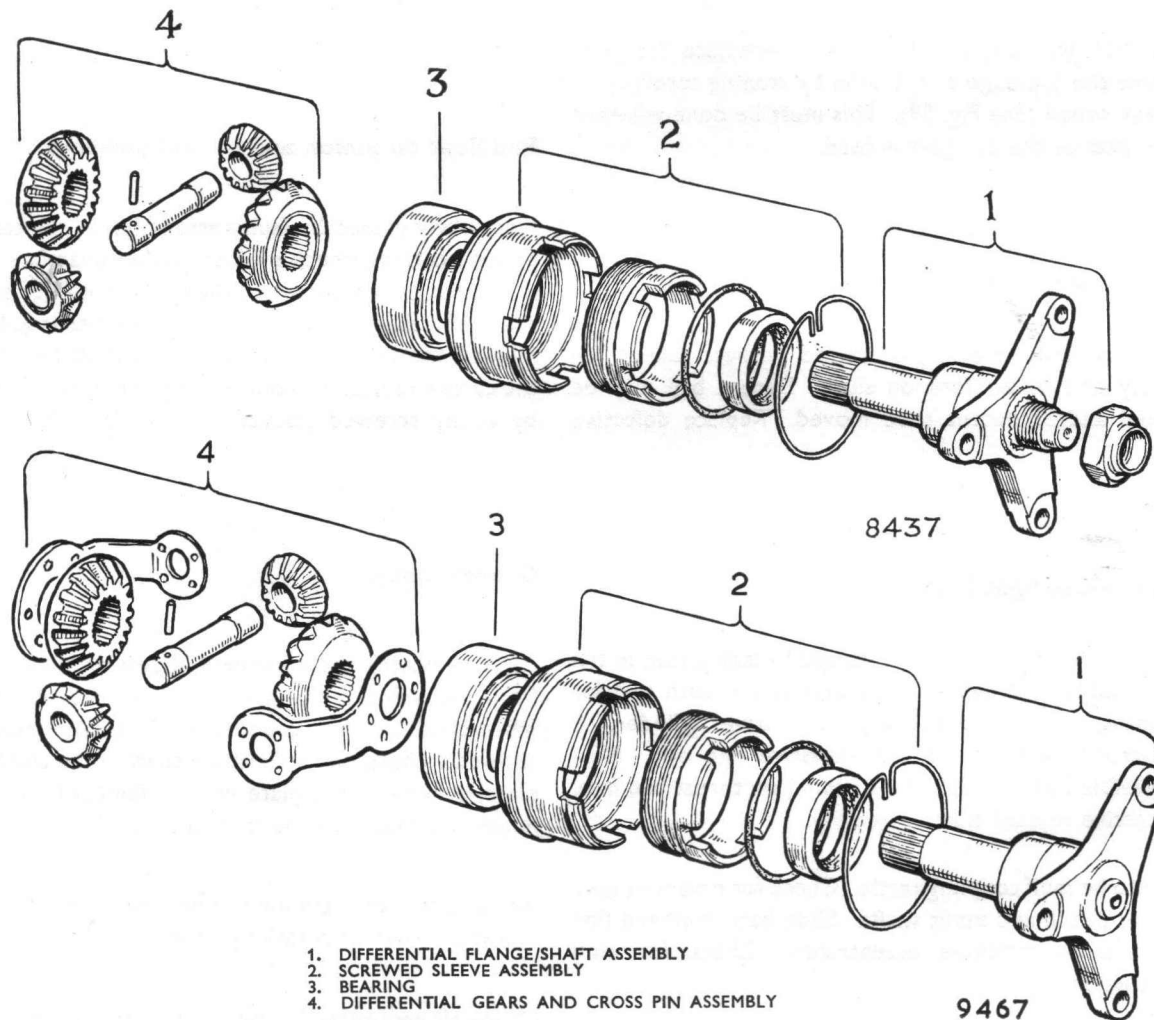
Exploded view of alternative drive flange/shaft assemblies
